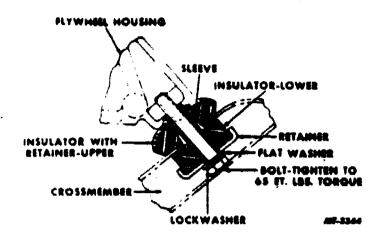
Engine Rear Mounting With 2-Piece Insulator.
